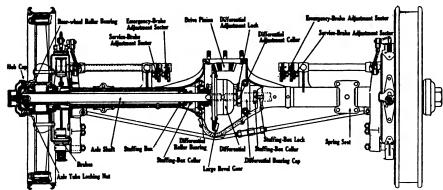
FULL-FLOATING REAR AXLE USED ON OVERLAND MODEL 71
